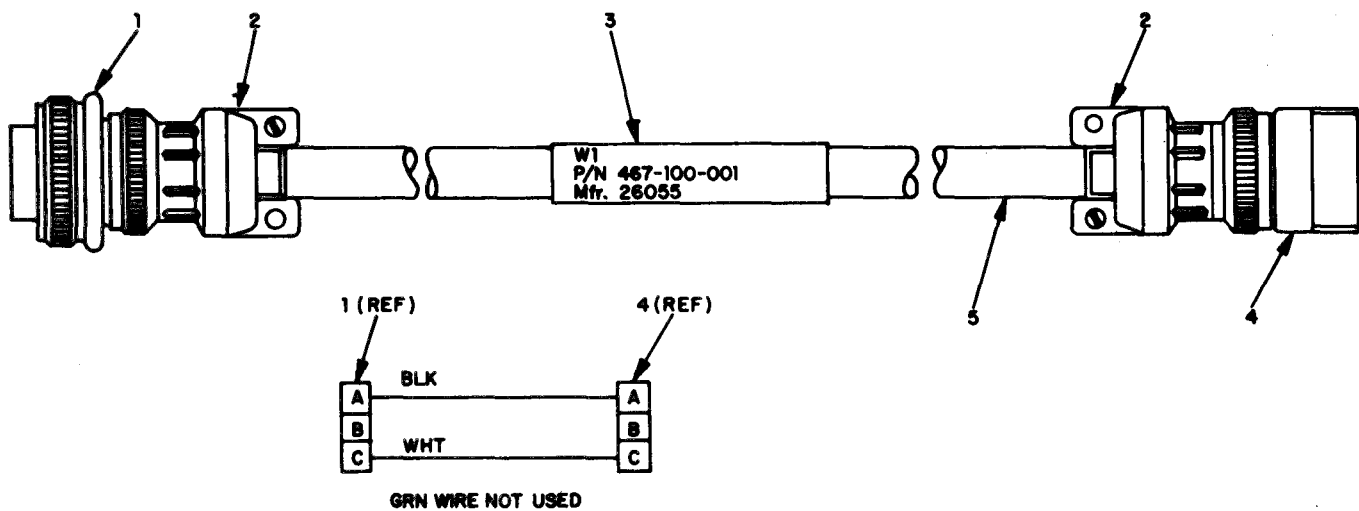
Input power cable assembly W1, part number 467-100-001
